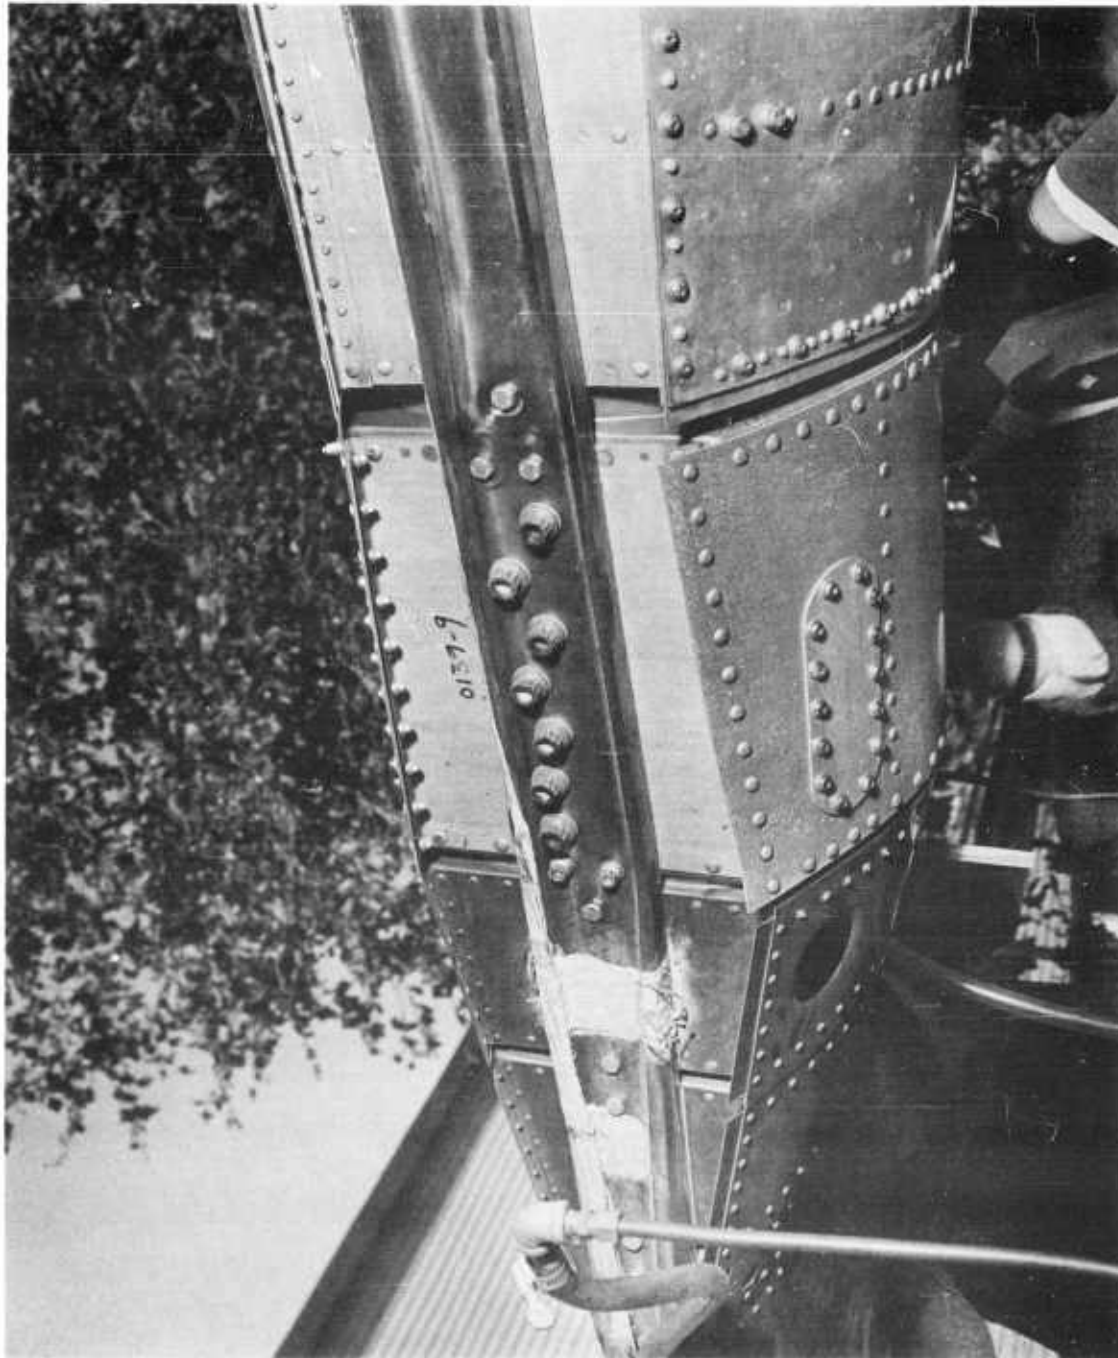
Front Spar Cooling Tube Arrangement and Typical Strain Gage Installation
